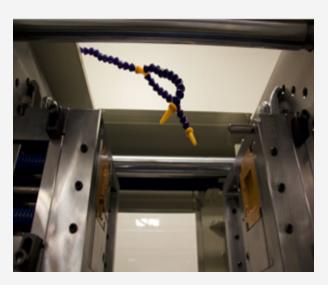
Nozzle blowing compressed air on 3D printed mold tool
